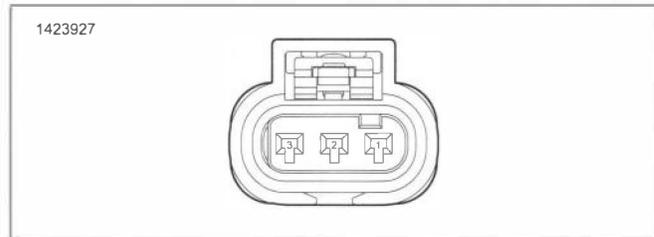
Rear Exhaust Cam Sensor [14RE]
